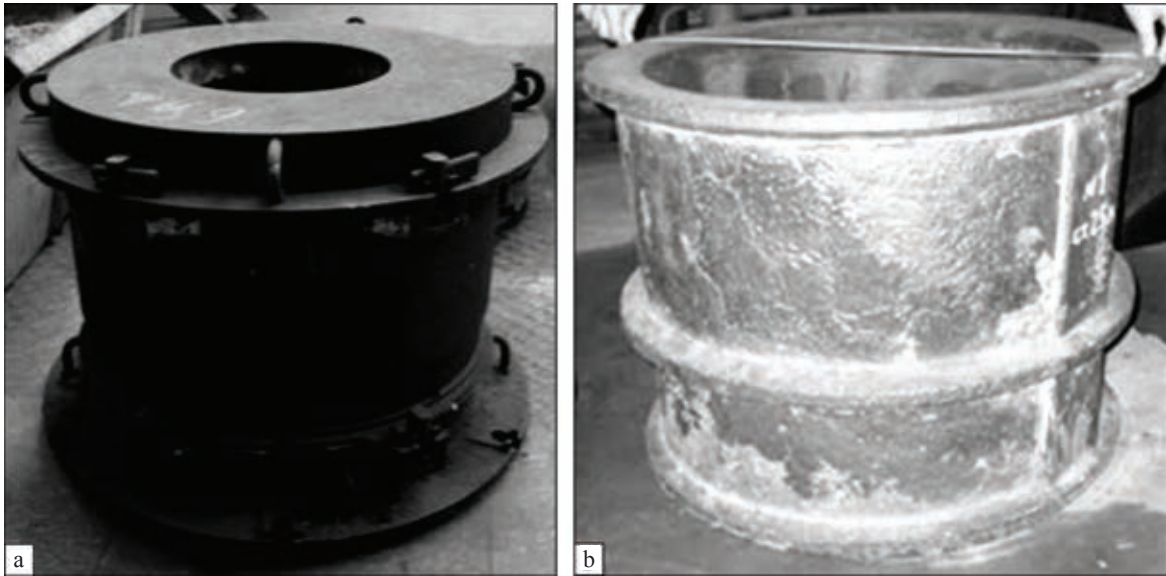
Sectional single-position ingot moulds for centrifugal electroslag casting (a) and the blank for a gas turbine (b).
